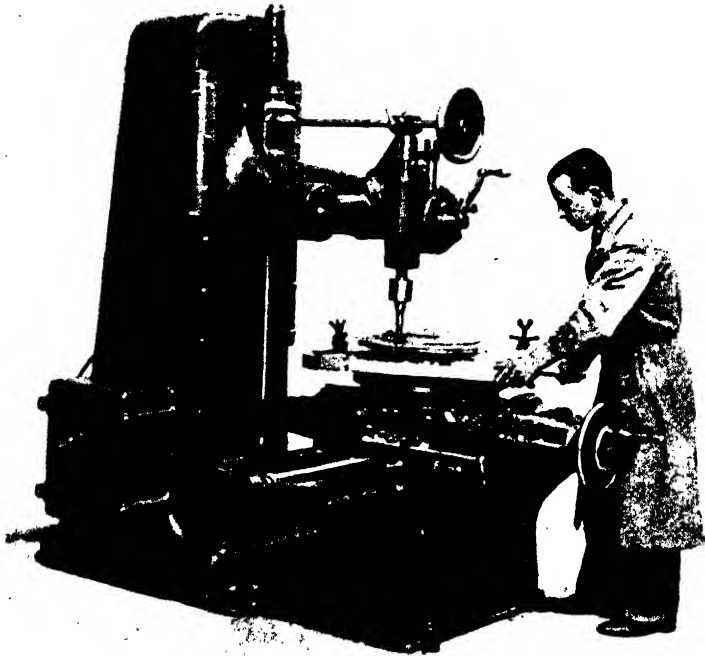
UNIVERSAL WOOD MILLING MACHINE
